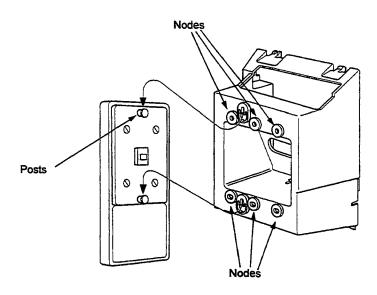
Attaching the Wall Mount Unit to the Wall
